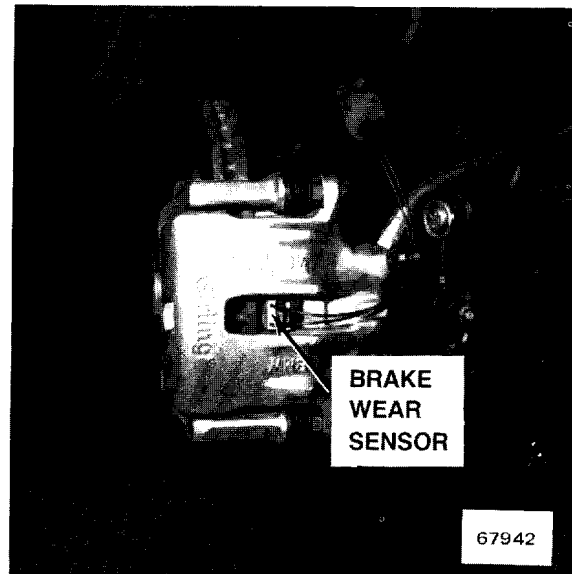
LH Front Brake Caliper Assembly (RH Rear Similar)
